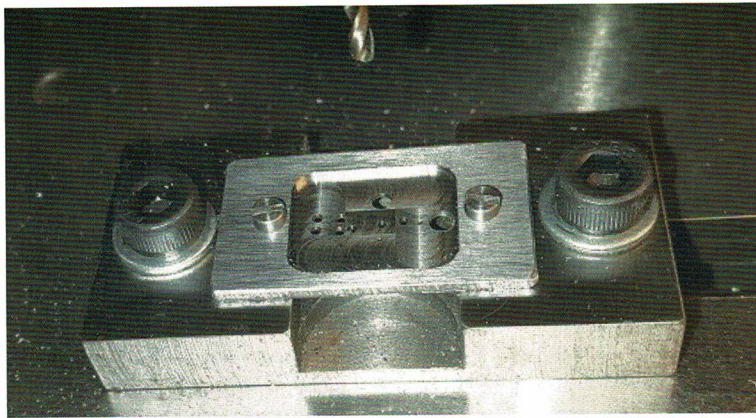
Embryonic lever No. 12. Drilling the final 1.7mm clearance hole for holding down screw for subsequent operations after cutting out.
